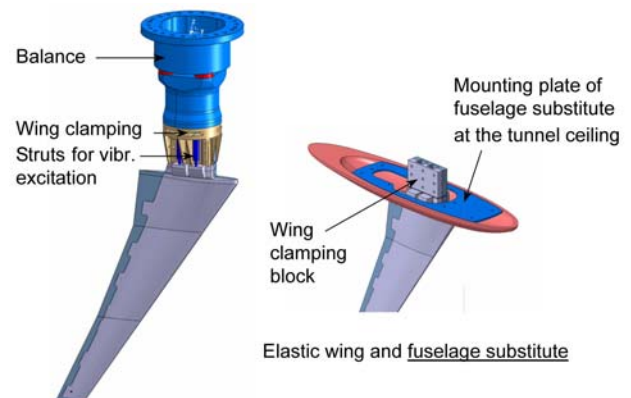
Complete windtunnel assembly. No contact between the elastic wing and the fuselage substitute
